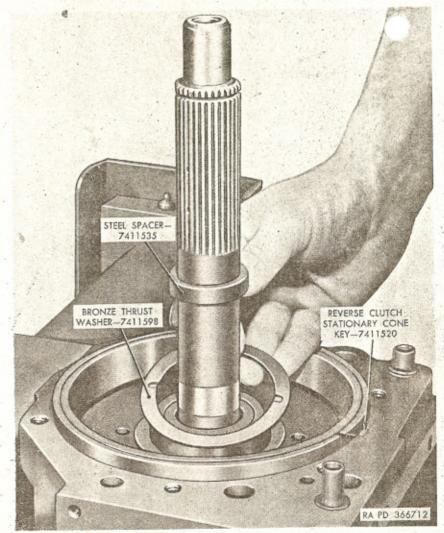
Removing or installing reverse carrier spacer and internal gear thrust washer (303M).
